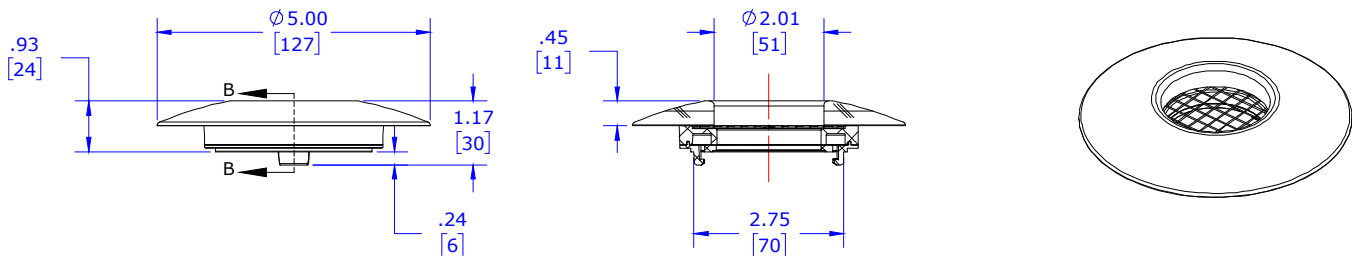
UPC-57T, Wood Faceplate Dimensions (2-inch only)
